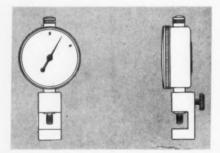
Gaging fixture designed for the purpose of gaging small intricate components.
